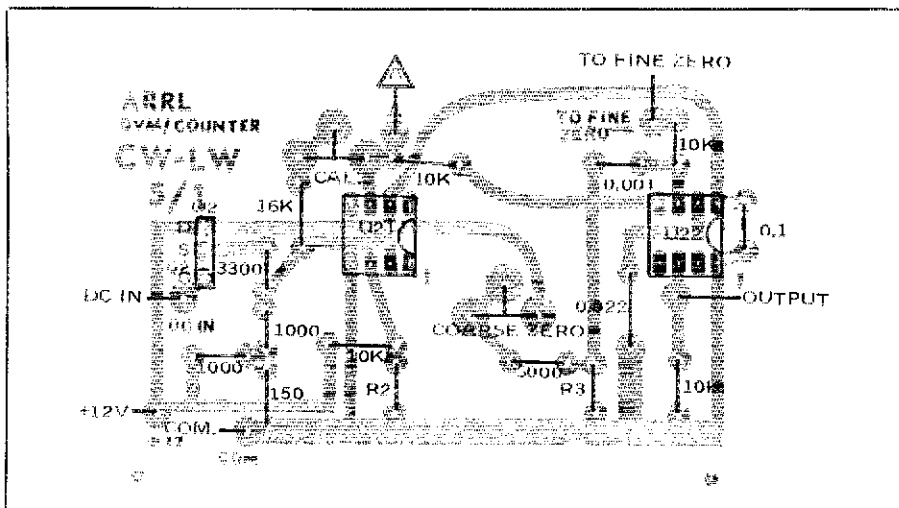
Etching pattern and parts placement guide for the improved voltage-to-frequency converter circuit. This layout is shown at actual size from the foil side of the board, with grey representing copper.
